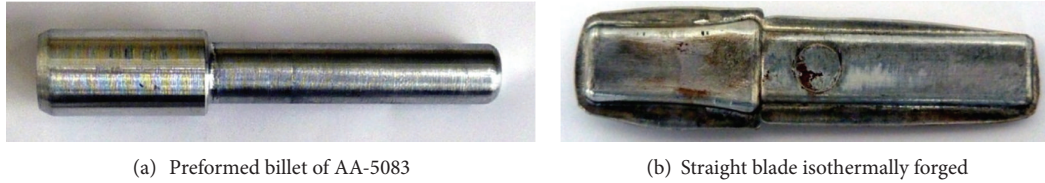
Shape of the preformed billet and the manufactured straight blade.
